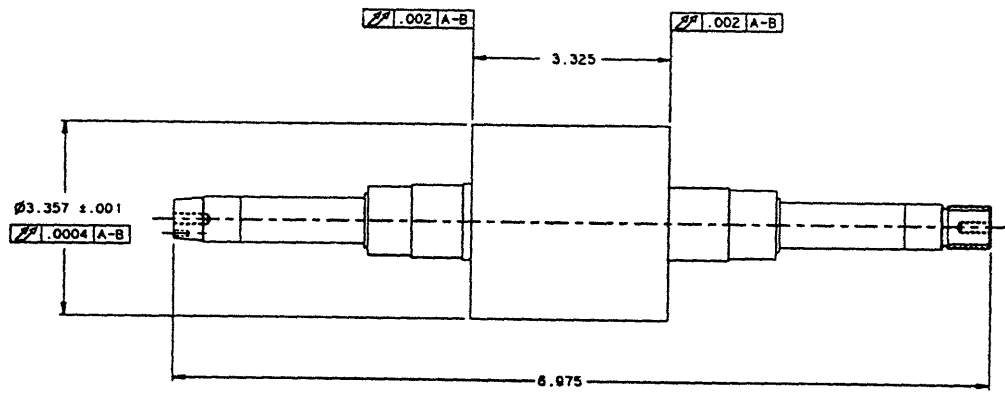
Integral shaft/core using representative dimensions (British units) from the starter/generator
